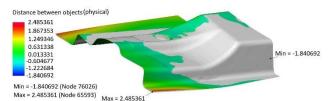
Surface displacement of irregularly shaped stamping from nominal geometry of stamping shape (shown grey) in analysis "Signed Displacement" from
